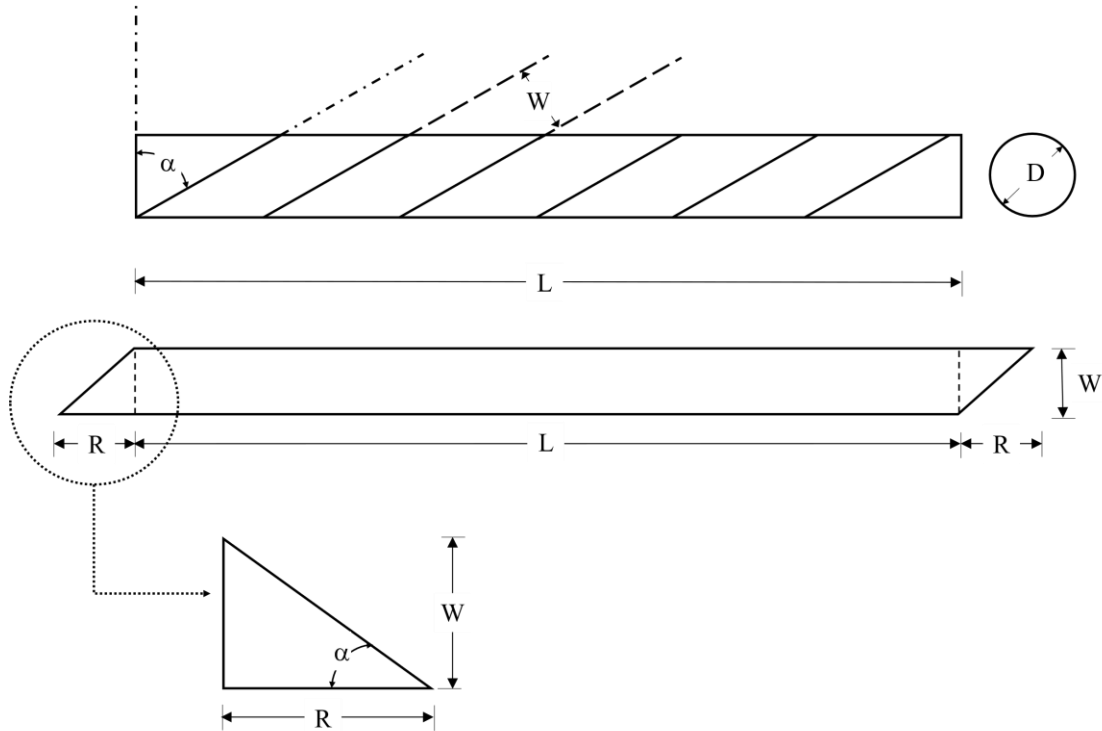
Basic dimensions of the spiral welded pipe.
